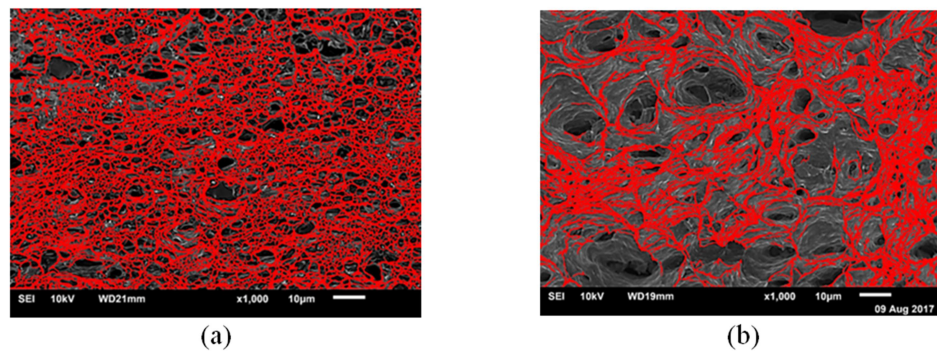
SEM fractographic images after image processing of fractured AA7075-O uniaxial tension sample tested at 10 mm/min; (a) room temperature test, and (b) 220°C test.
